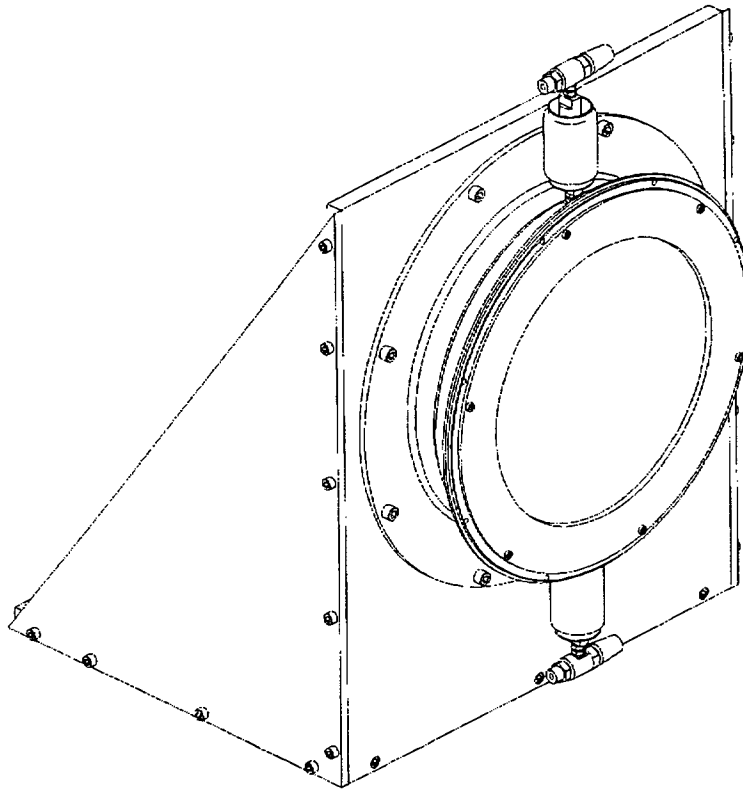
CELL #2 FILL STAND ASSEMBLY
